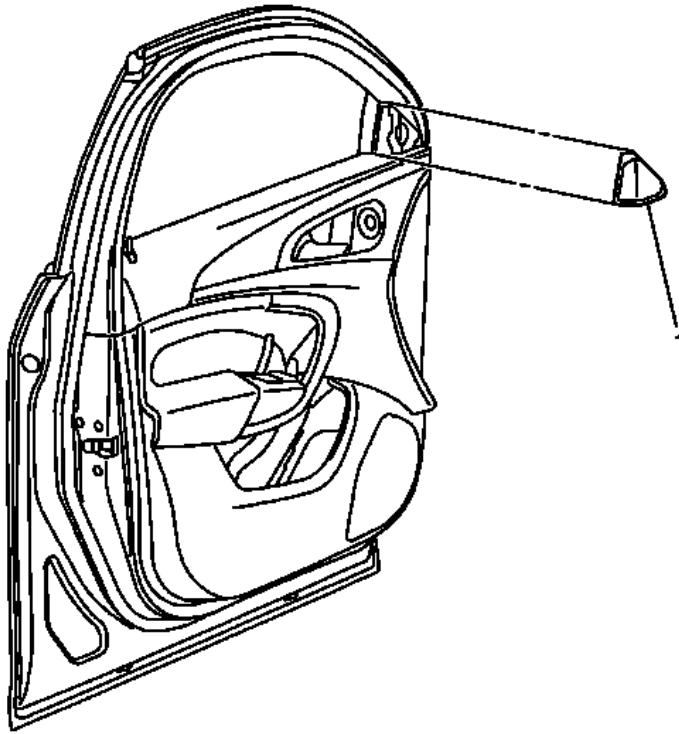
Front Side Door Outside Rearview Mirror Filler
